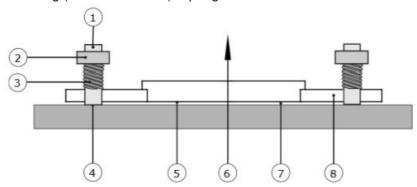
Industrial heat flux (6) sensor (5) mounted using flanges (8) with tack welded (4) threads (1) and spring (3) loaded nuts (2). The space (7) between sensor and object is filled up to avoid air gaps.
